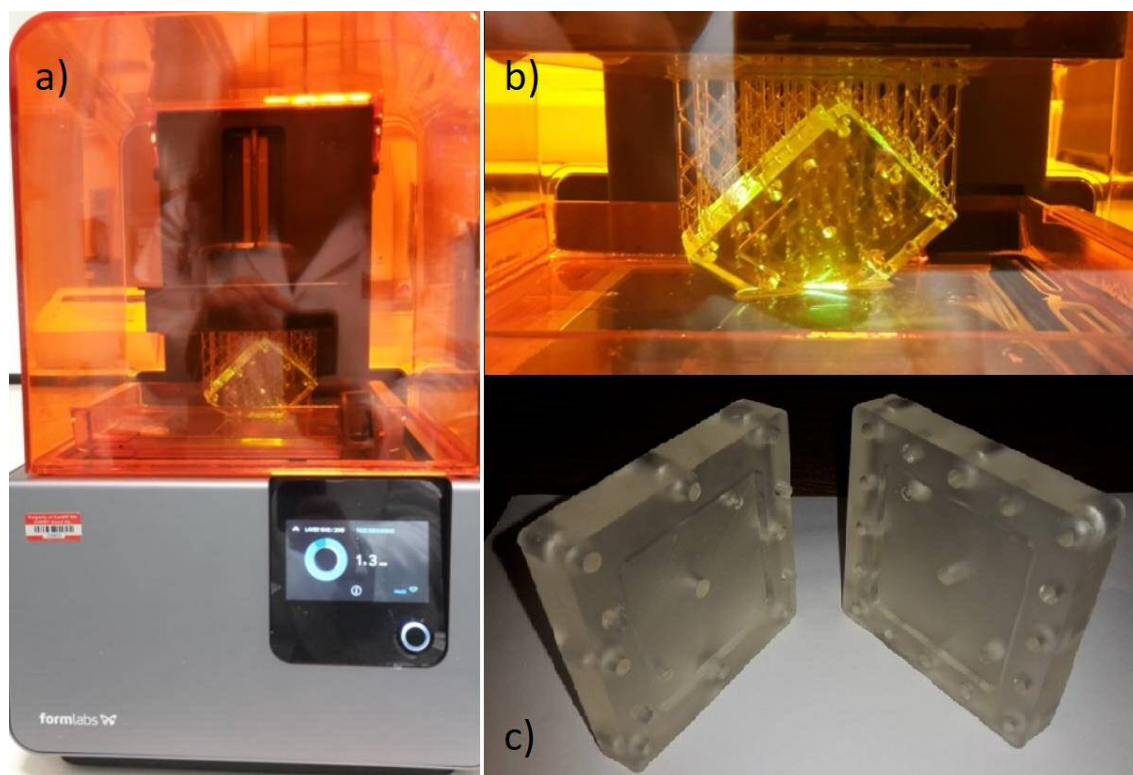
a) 3D printer; b) closeup to the 3D printer while printing the reactor; c) finished 3D printed reactor “Río”.
